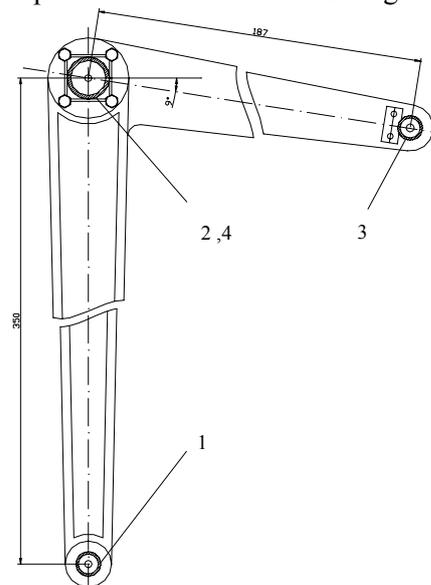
Sub ensemble of first wire brake mechanism, 1,2,3,4 – bronze bushes
